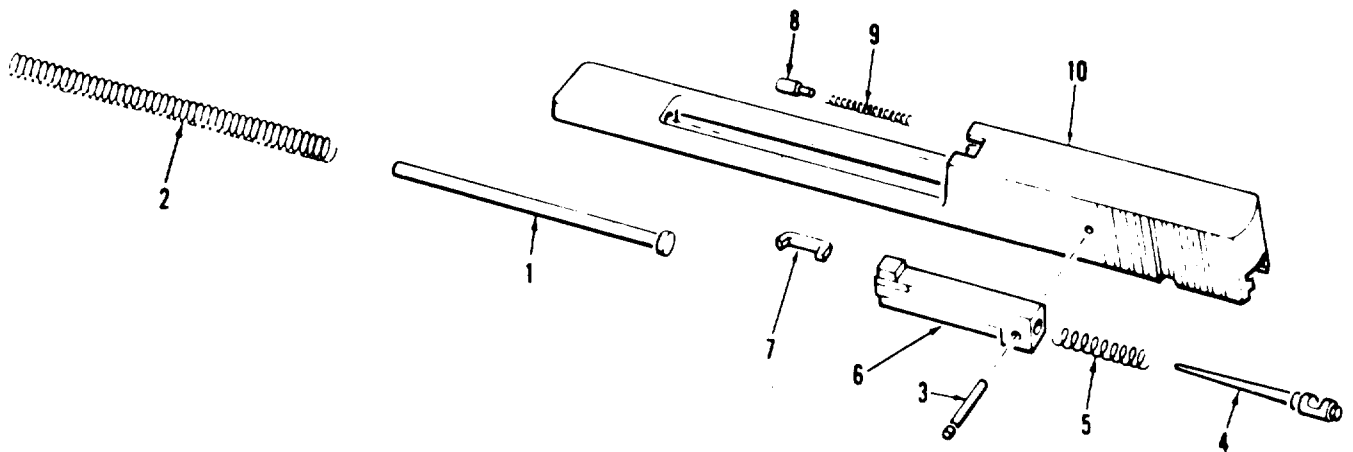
Slide assembly for Model 46 Smith and Wesson cal. .22 automatic pistol-exploded view
